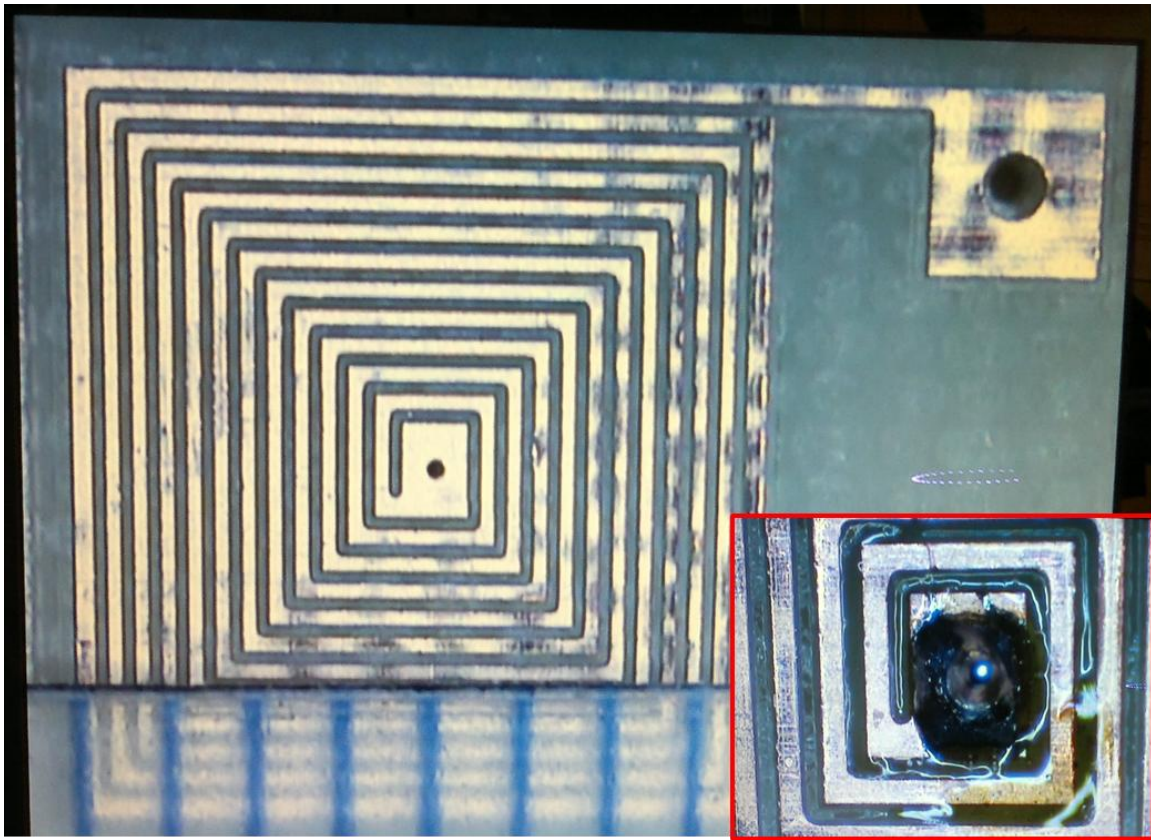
Picture of one of the $8 \times 8\ \text{mm}^2$ flat spiral coils with 3 turns/mm milled on a copper-clad laminate 1oz PCB. Inset: soldering joint for the center lead.
